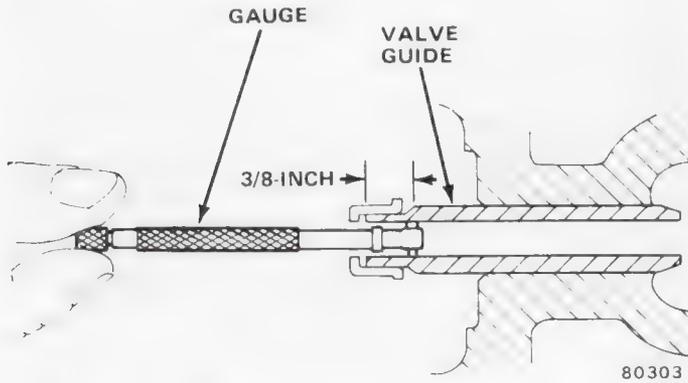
B-26 Measuring Valve Guide with Telescoping Gauge
